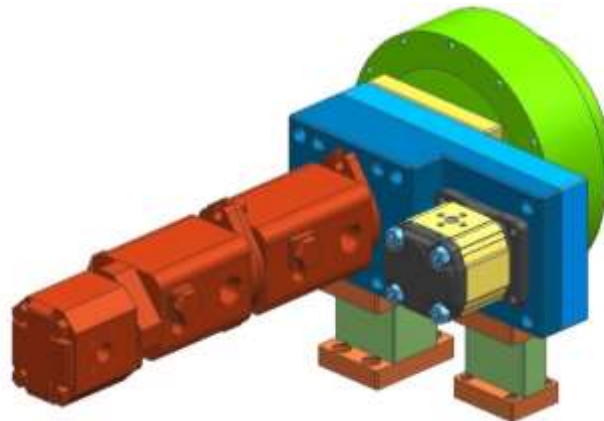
Assembly with electric motor, transmission box, triple pump and auxiliary pump.
